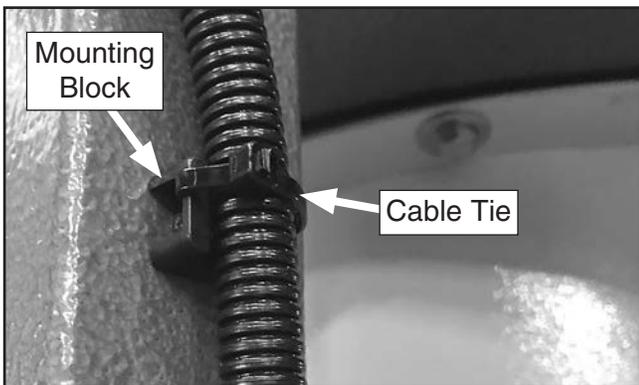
Conduit secured to mounting block with cable tie (1 of 4 locations shown).
